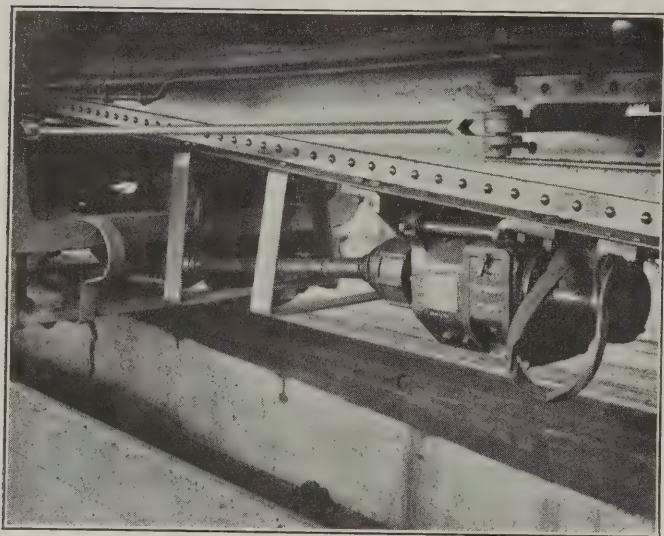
Gould Direct Drive Equipment Mounted on D. L. & W. Car
